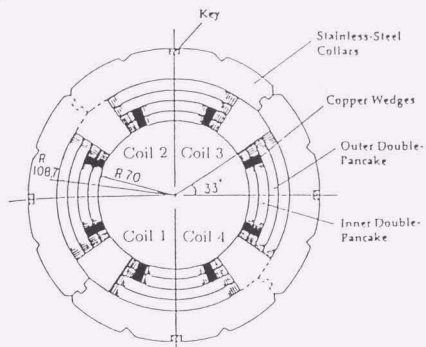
Cross-section perpendicular to center axis of quadrupole magnet.
